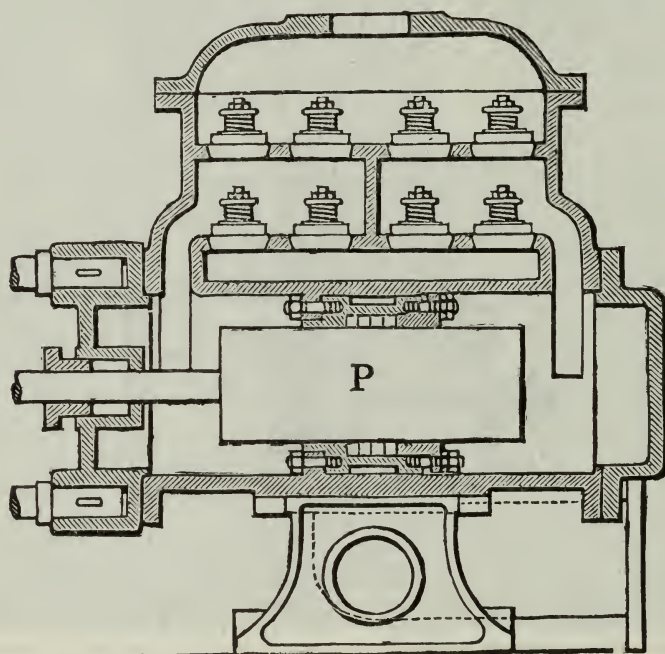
,283.—Double acting inside packed plunger water end showing sectional view of working parts.
